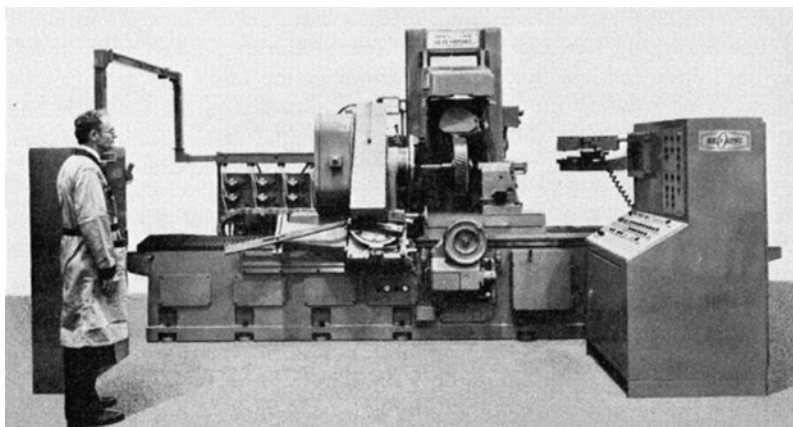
An automated general-purpose form-grinding machine capable of doing external or internal gears up to 600 mm (24 in.) pitch diameter and up to 45° helix angle. (Courtesy of National Broach and Machine Co., a division of Lear Siegler, Detroit, Michigan.)
